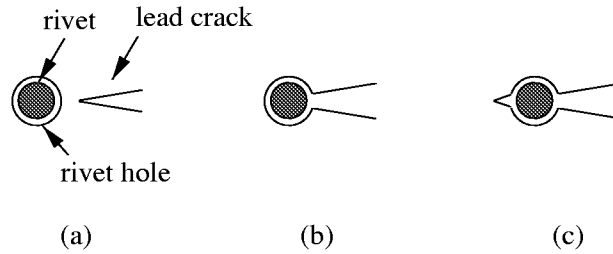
Illustration of crack propagation near rivet: (a) lead crack approaching rivet, (b) lead crack growing into rivet hole, and (c) new crack initiating out of rivet hole.
